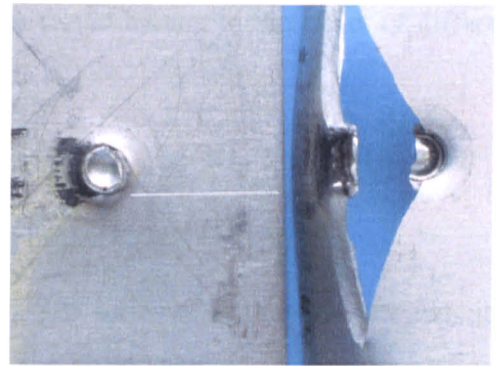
Rivet pull-out failure for the shear test
